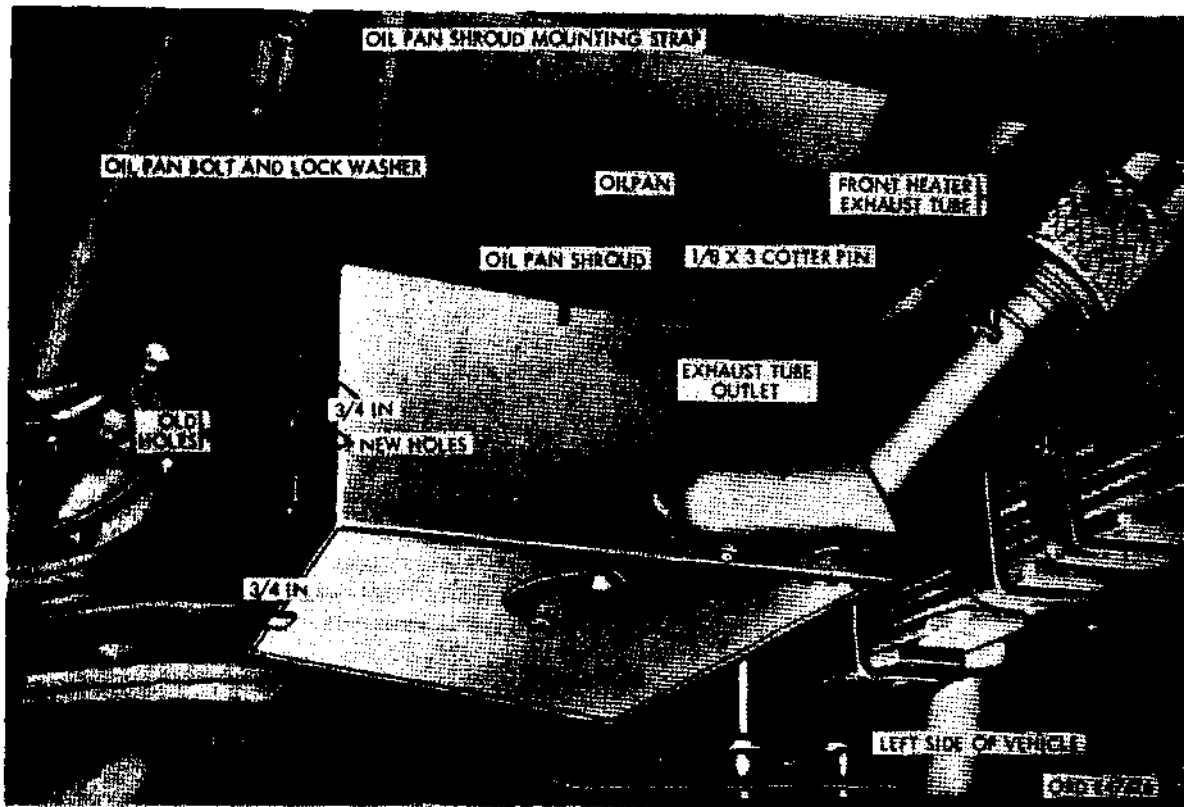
Engine oil-pan shroud and end of front heater exhaust tube installed
